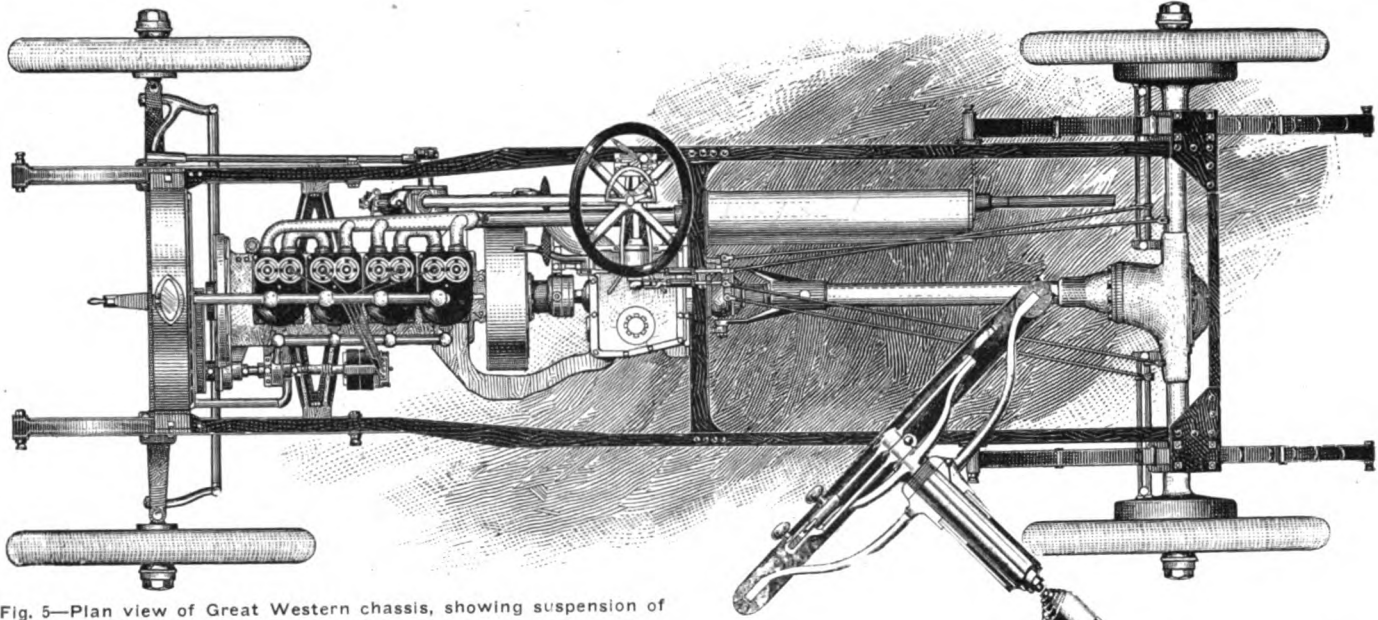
Plan view of Great Western chassis, showing suspension of motor and drive
